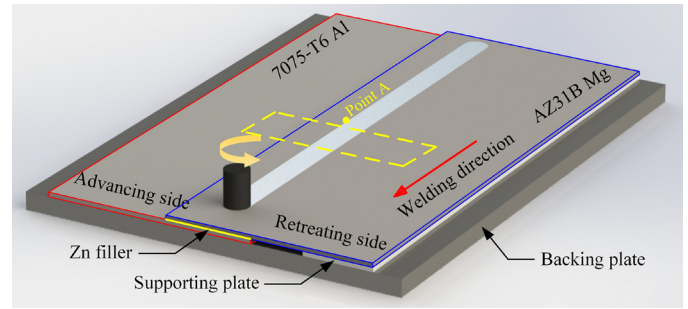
Schematic of dissimilar Al/Mg FSLW with a Zn filler
